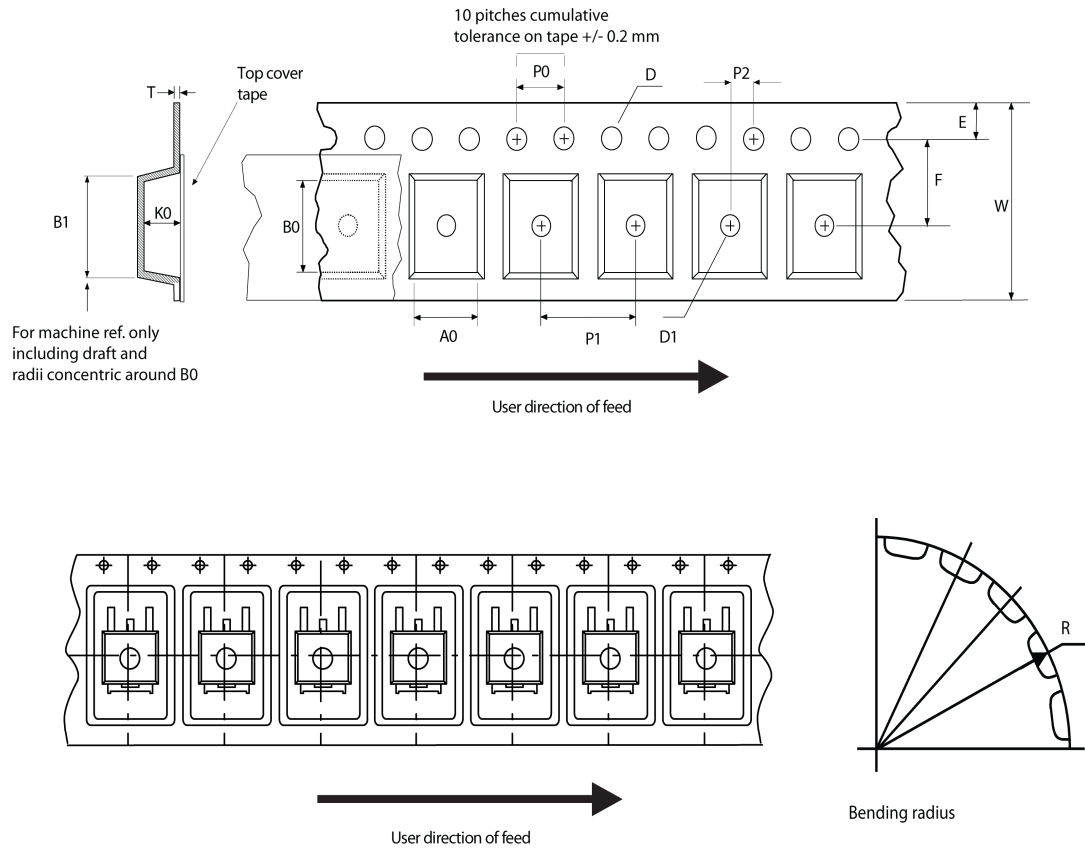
D<sup>2</sup>PAK tape drawing (dimensions are in mm)
